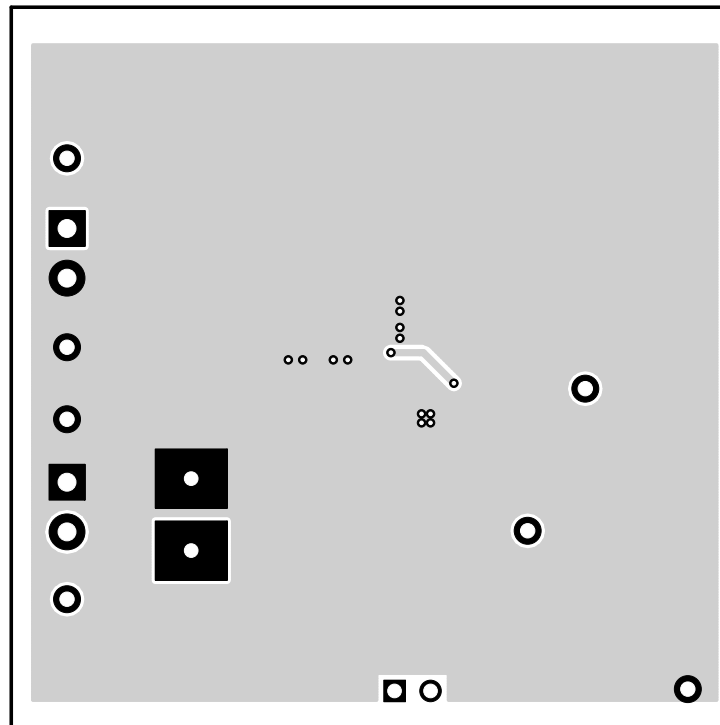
TPS54062EVM-695 Bottom-Side Assembly
